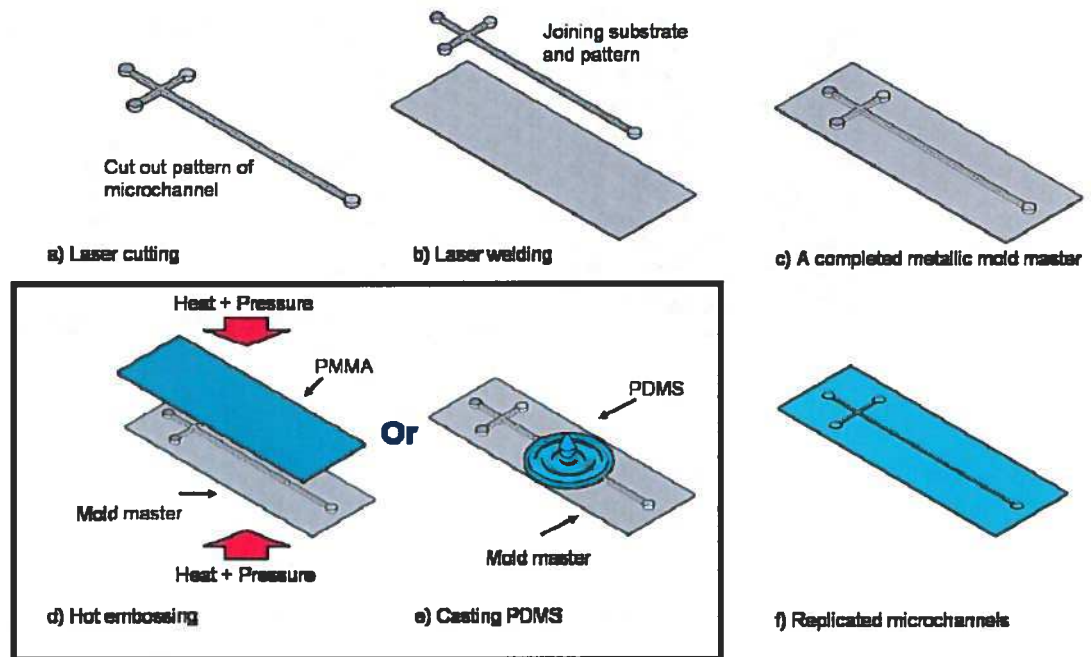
LCWM fabrication process for creating polymer microfluidic devices. The basic steps include (a) laser machining of the microrelief pattern, (b) laser microwelding the cut pattern onto the substrate to form the (c) metallic mold master. Once the mold master has been fabricated, the master can be used for either (d) hot embossing (HE) with a PMMA sheet or (e) casting an elastomer (PDMS). Finally, the replicated microfluidic device with desired features and dimensional accuracy is produced (f).
